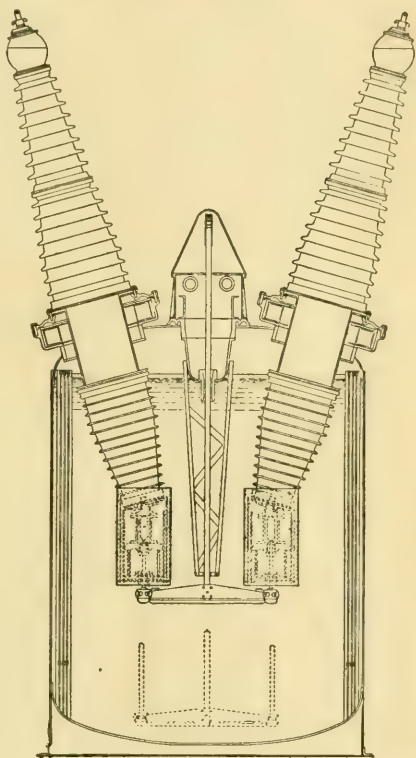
Cross-section of One Unit of 220,000 Volt Oil-circuit Breaker.
